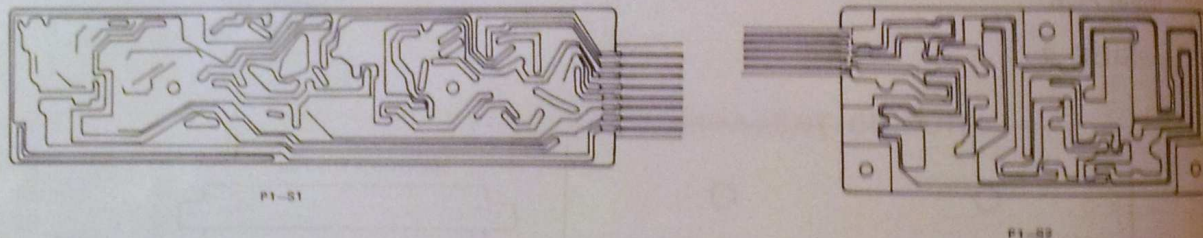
POWER SUPPLY CIRCUIT BOARDS VIEWED FROM PATTERN SIDE
